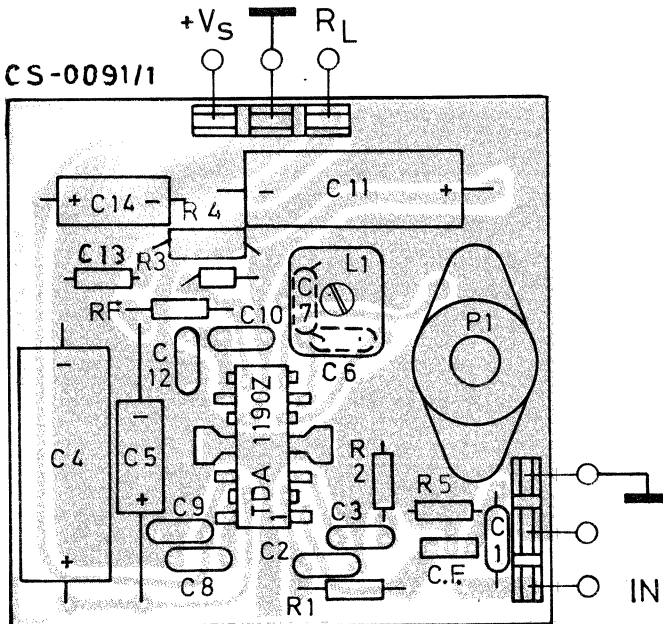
P.C. board and component layout of the circuit shown in Fig. 16
